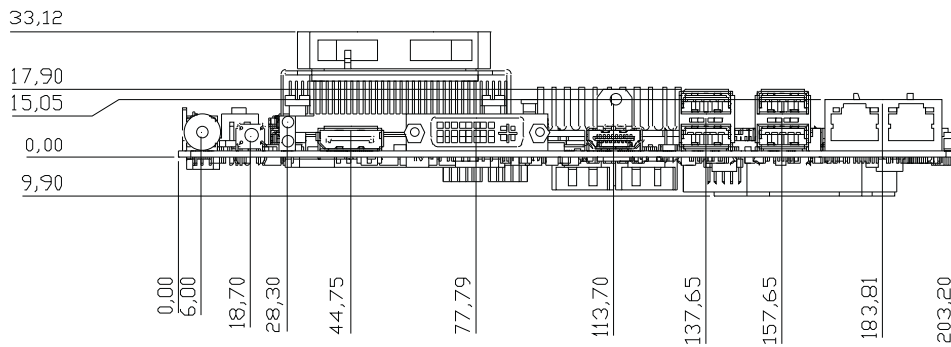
MIO-9290 Mechanical Drawing (Coastline)
